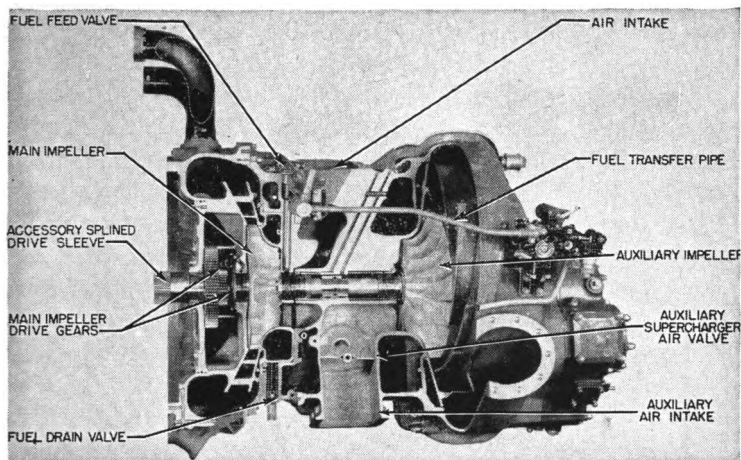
Cutaway view of main supercharger inlet and auxiliary supercharger sections.
